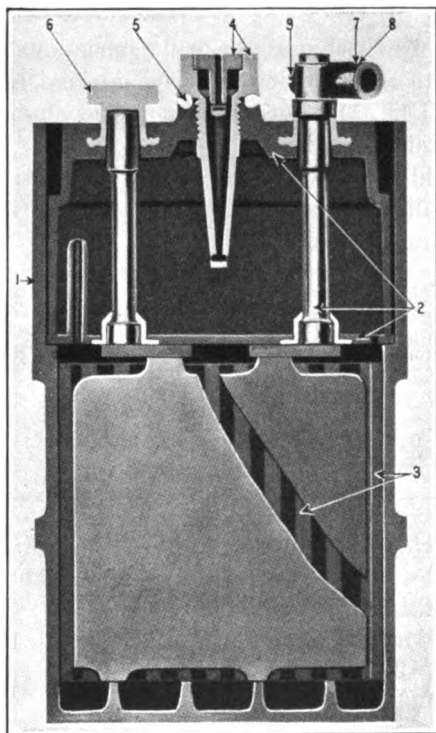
Vertical section of the Willard battery. Type SY-13.
